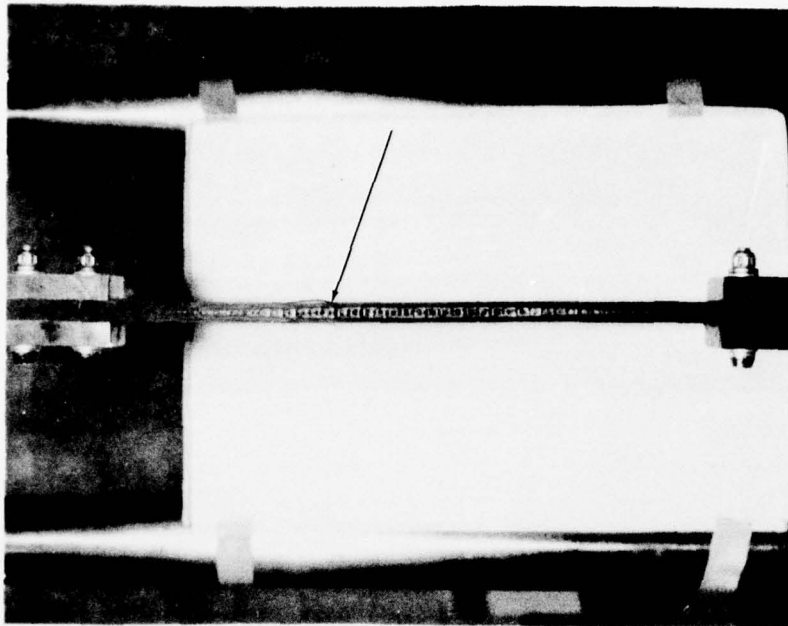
EDGEWISE VIEW OF AXIAL FATIGUE
